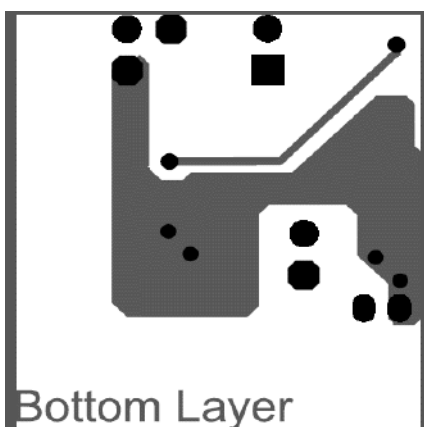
PCB Trace Layout of LED Driver models ML-080T402000, ML-100T402300 and ML-120T402750
